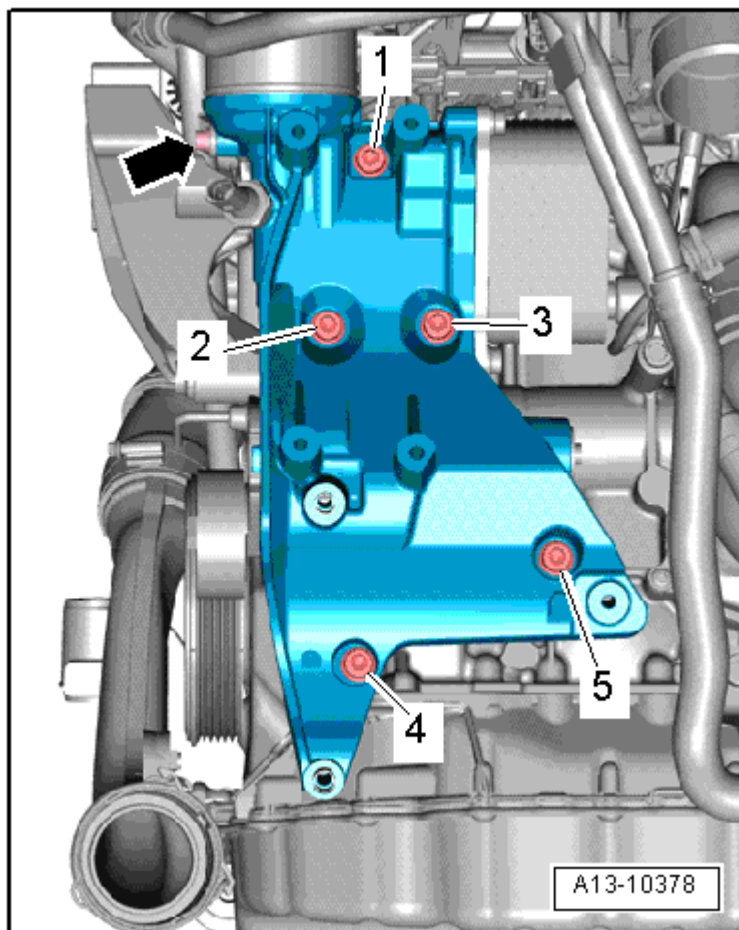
Identifying Accessory Assembly Bracket Tightening Sequence
